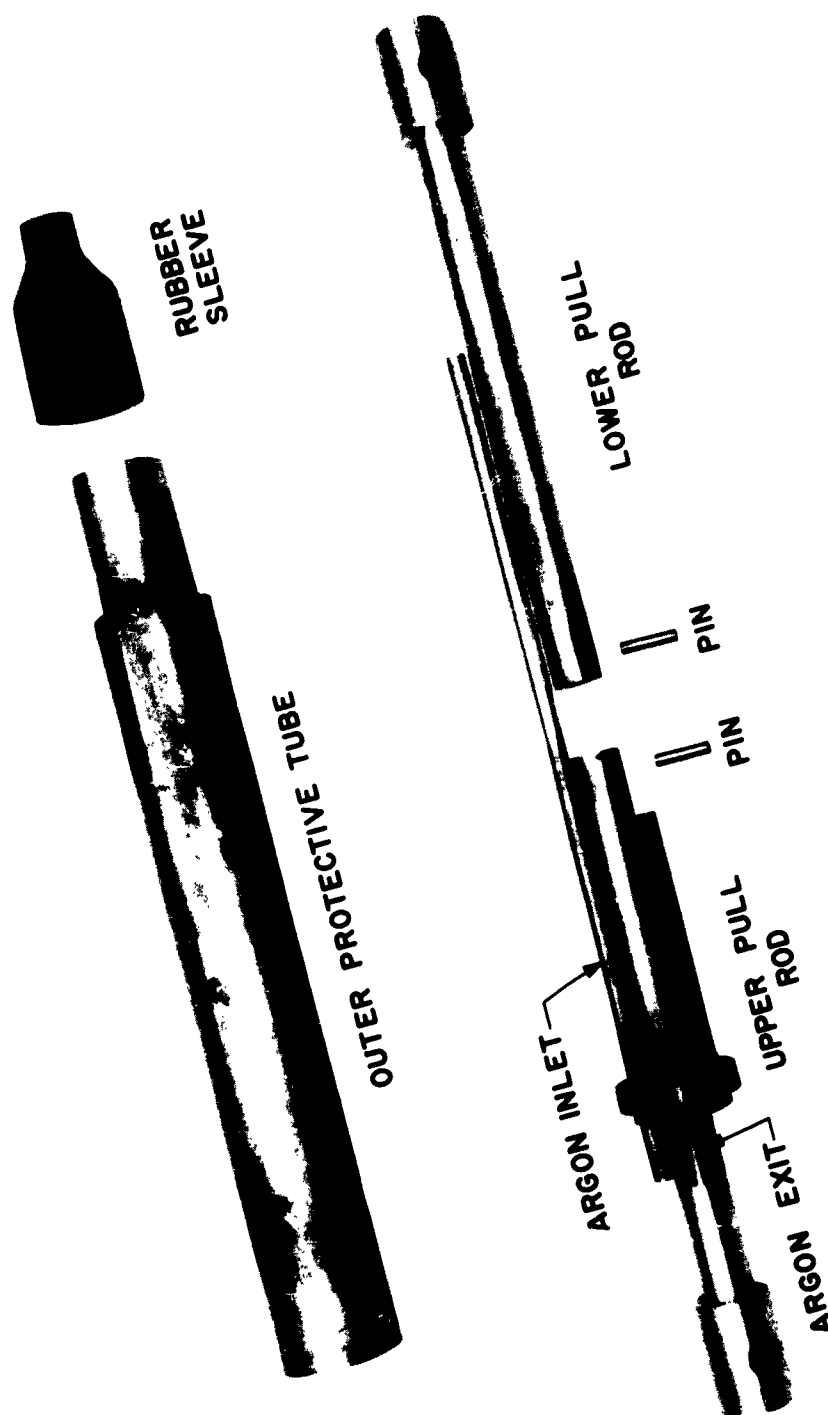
Beryllium Tensile Testing Encapsulation Assembly
